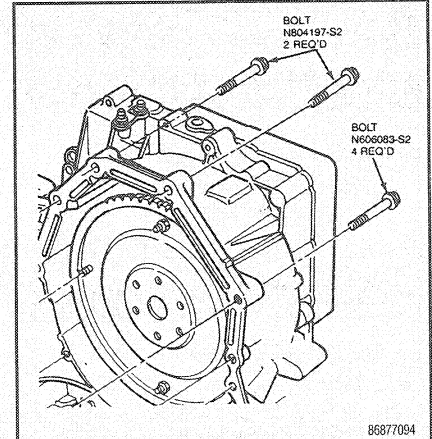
Remove the four torque converter housing bolts from the top of the transaxle
